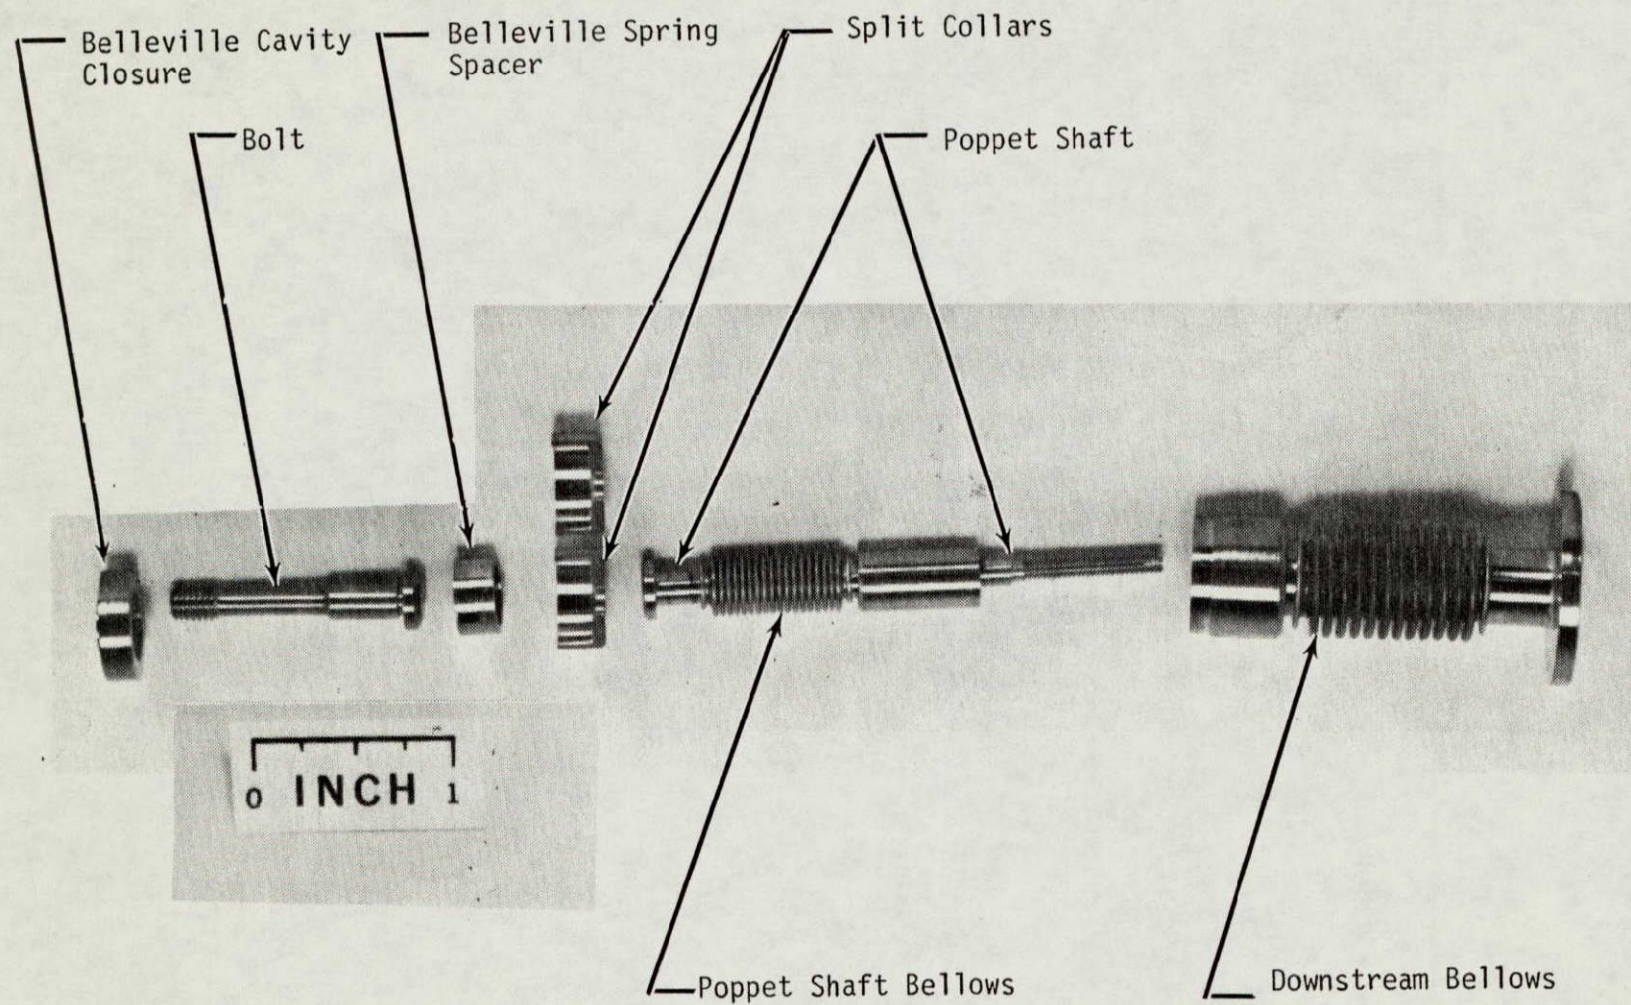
DOWNSTREAM BELLOWS & SPRING ASSEMBLY - EXPLODED VIEW
